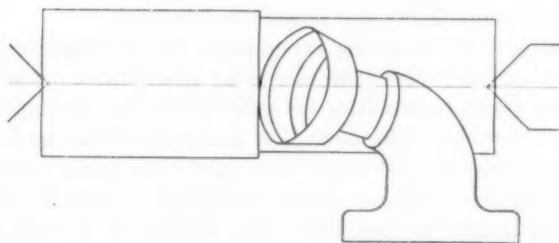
ROTARY TOOL MACHINING A SHAFT
